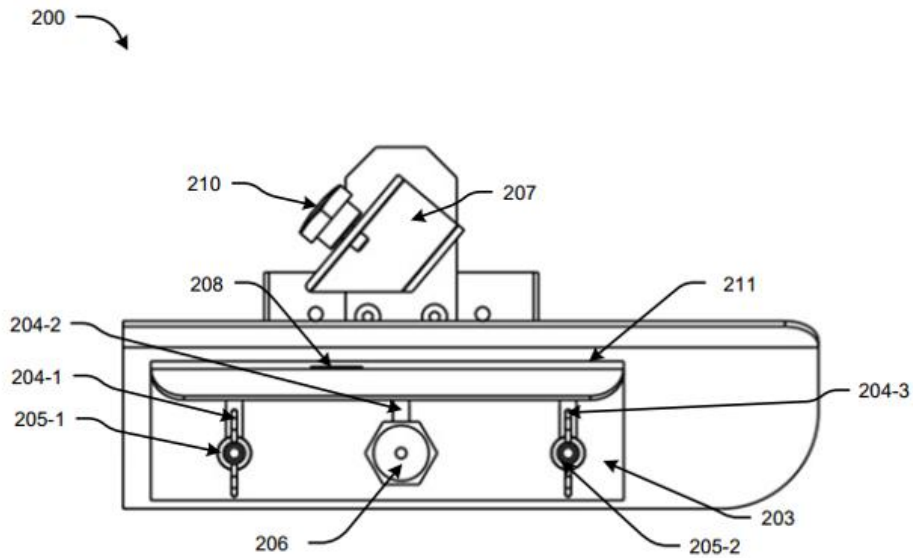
Cutting and slide assembly (part details). (Source: author)
